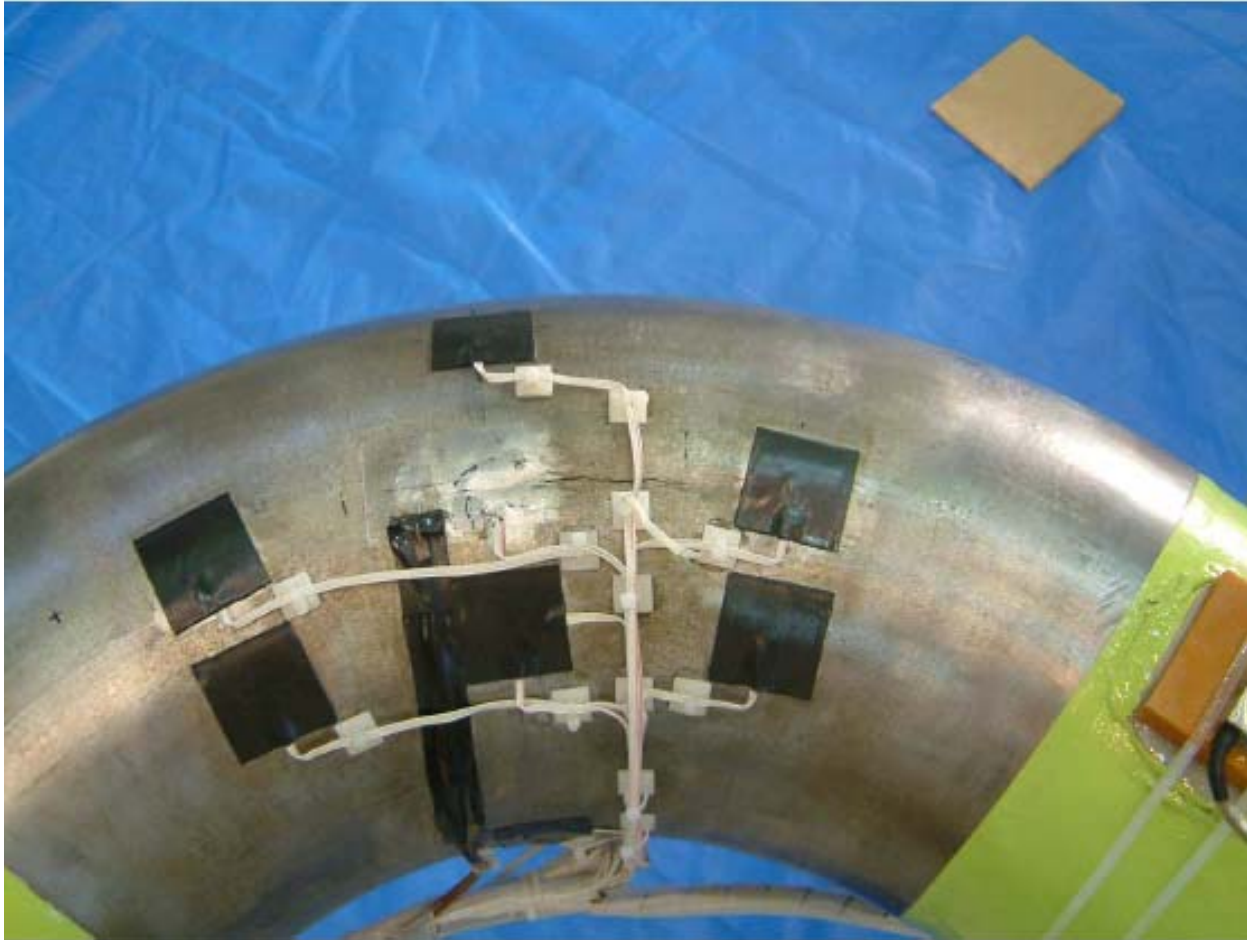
US Test Elbow 2 Fatigue Crack
